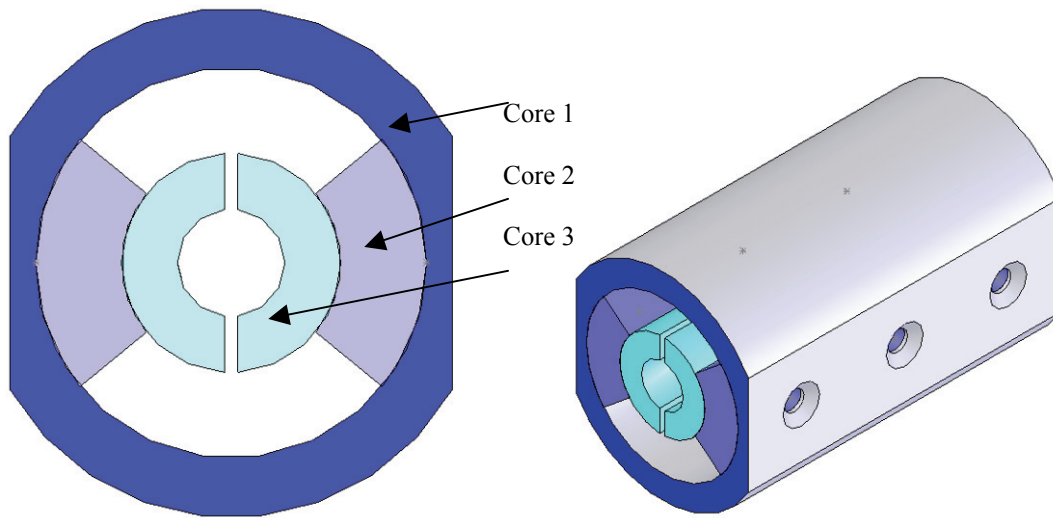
Three-layer and five-piece design of the iron yoke.
